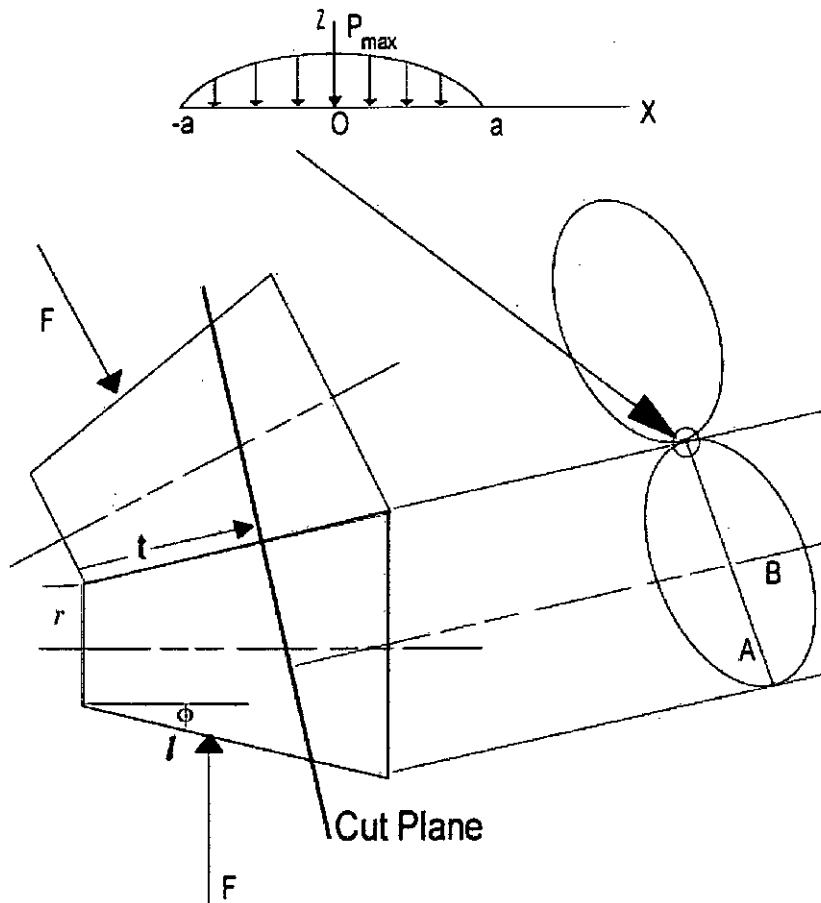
Side Cross sectional view of two conical rollers in contact
